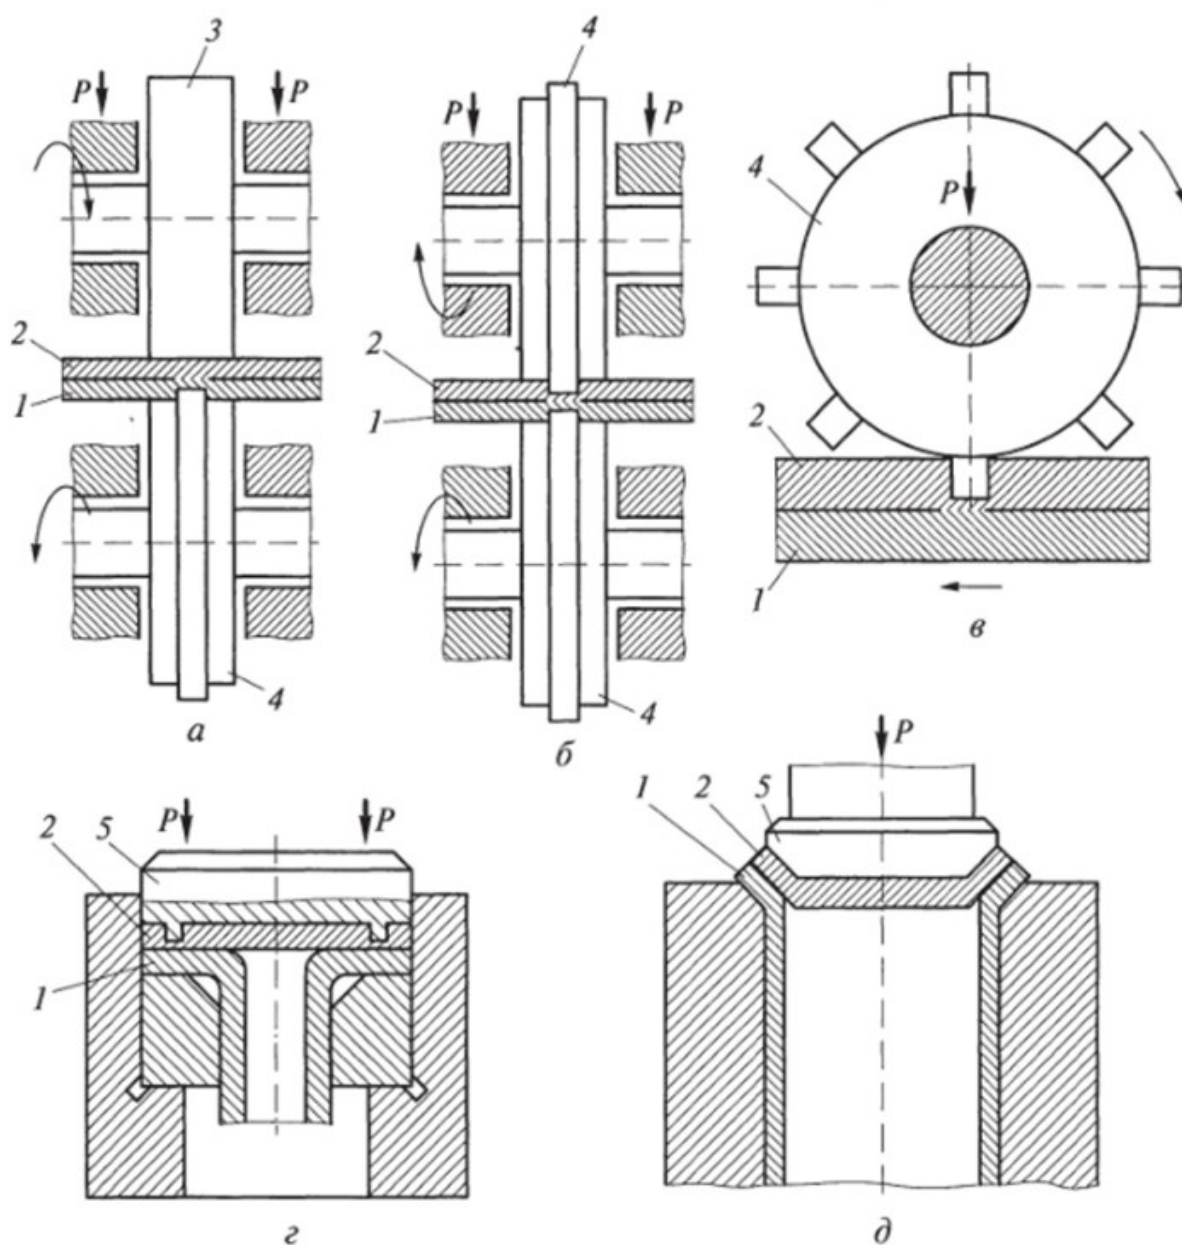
Scheme of cold spot welding with free flow of metal around the punch
